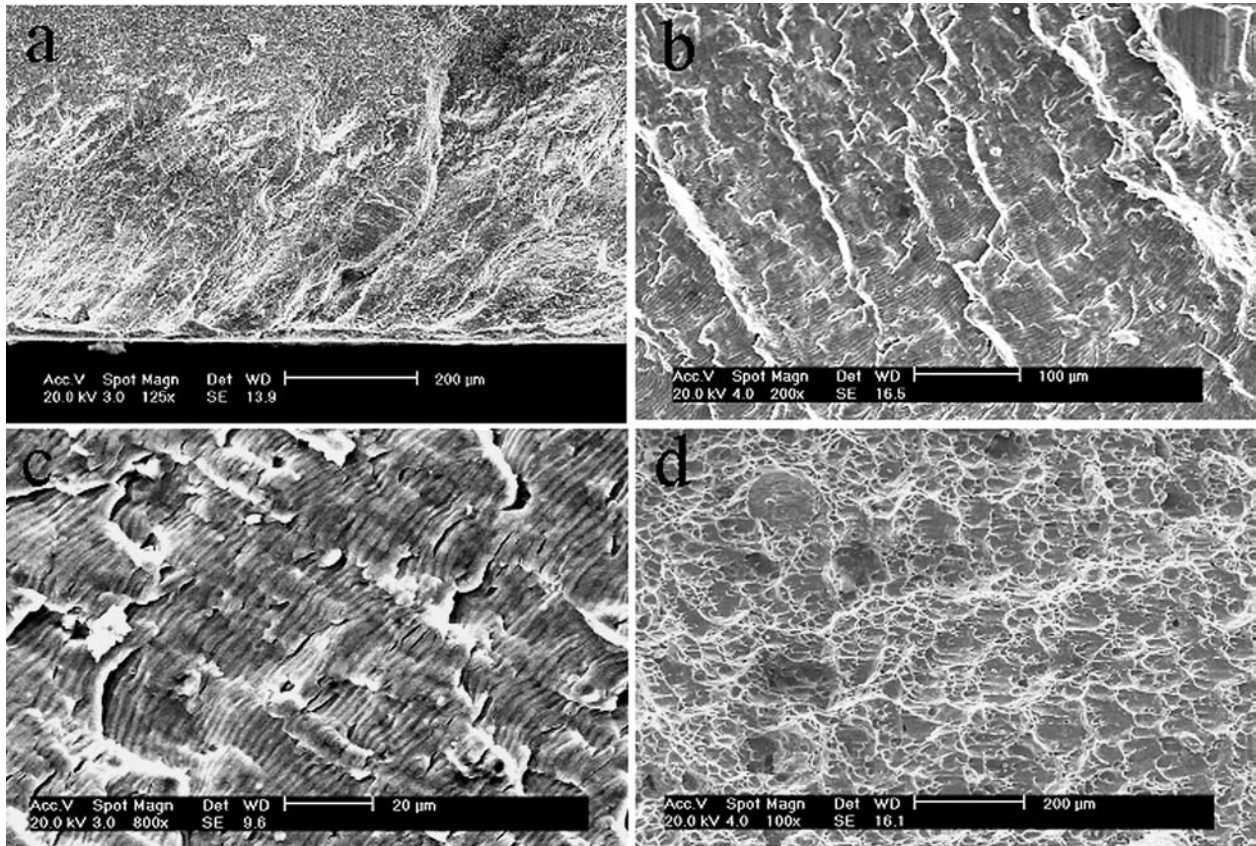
SEM images of fatigue fracture surfaces of the bonded weld.
